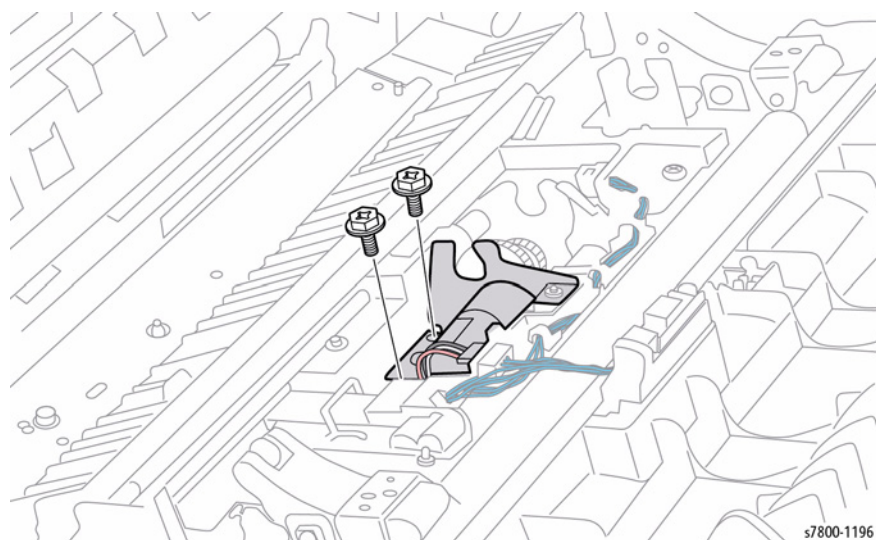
Removing the 2nd BTR Contact Retract Motor Assembly
